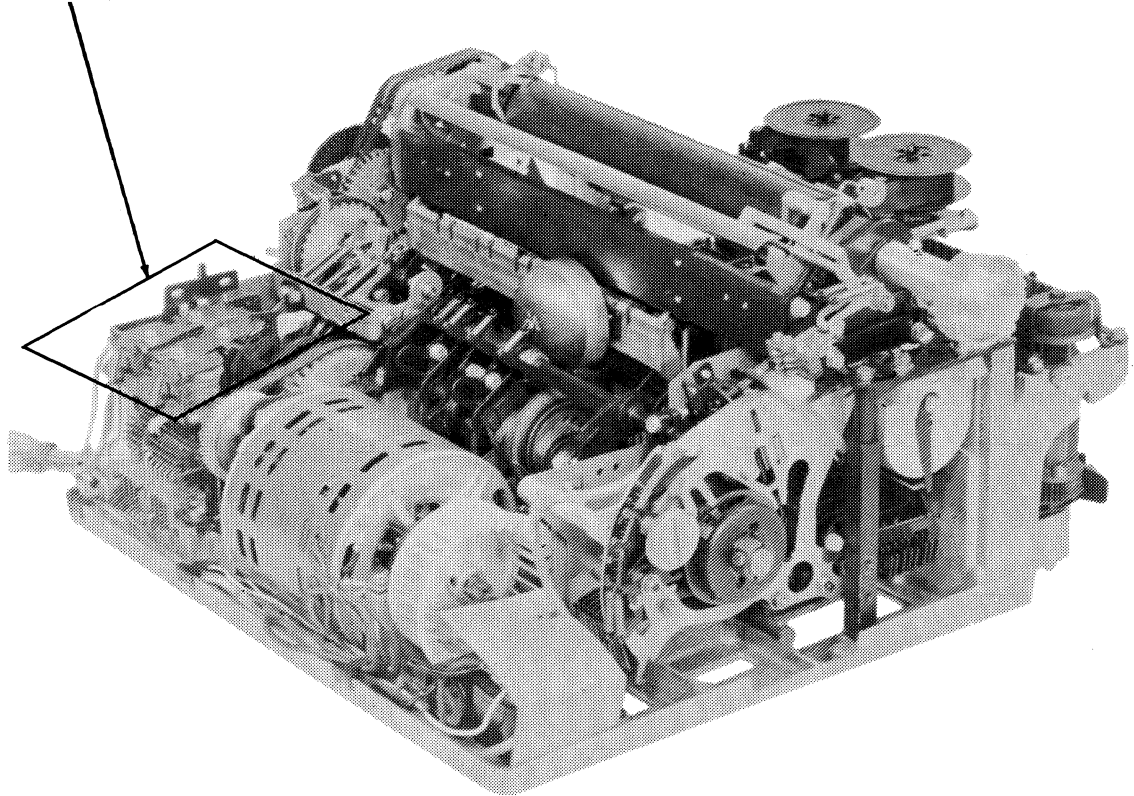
Clutch Trip Area (Without Reader Feed Magnet Contact Assembly)
